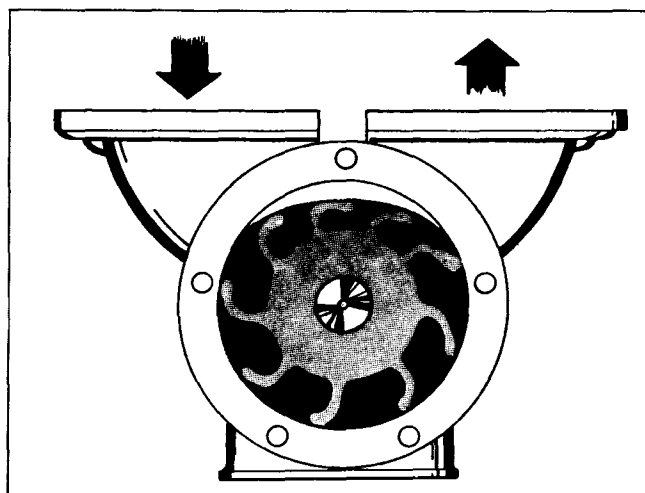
, (N20810). Impeller installed for left hand rotation
